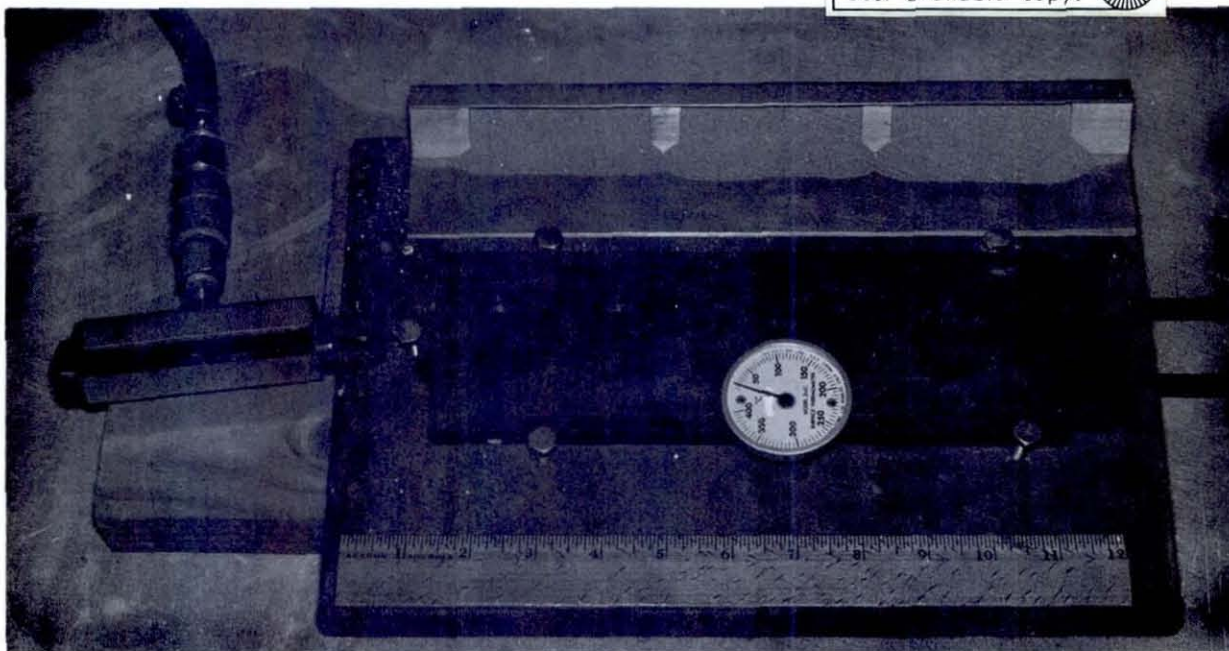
Shell tensile specimen gang pattern assembly with hopper strike-off assembly (top).
